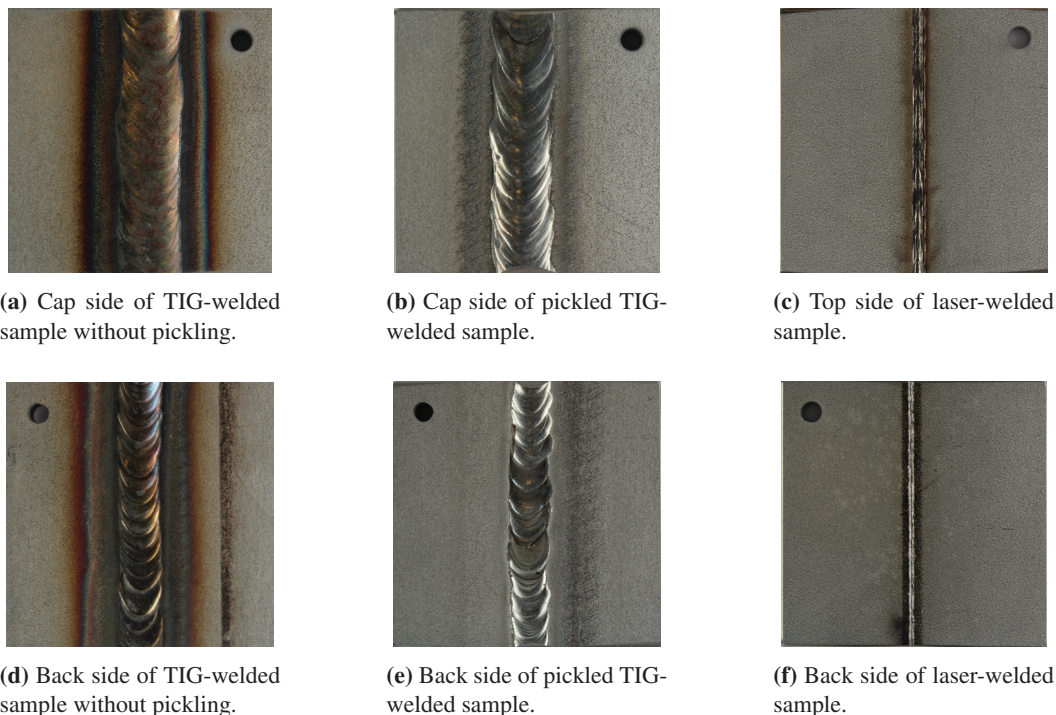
Samples showing all three different welded conditions tested.
